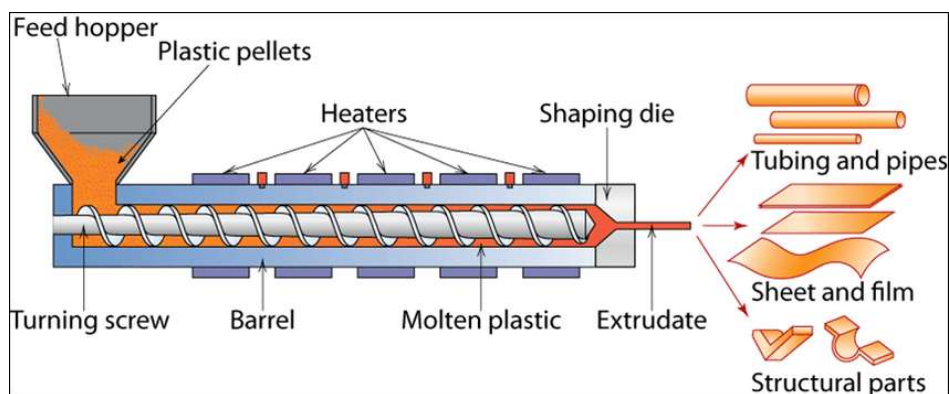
Scheme for a typical single-screw extruder showing extruding pipe [6].
